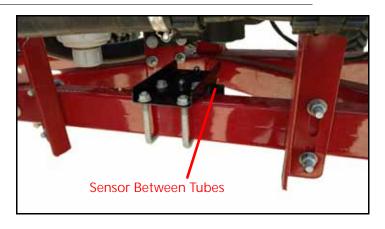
Inner Boom Sensor Installed (120' Steel Boom Shown)
